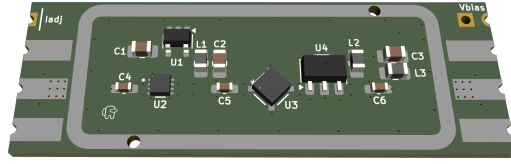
Top view of the first revision of the LNA PCB for CASM-256, designed to be soldered onto the antenna PCB. RFI cover not shown.
